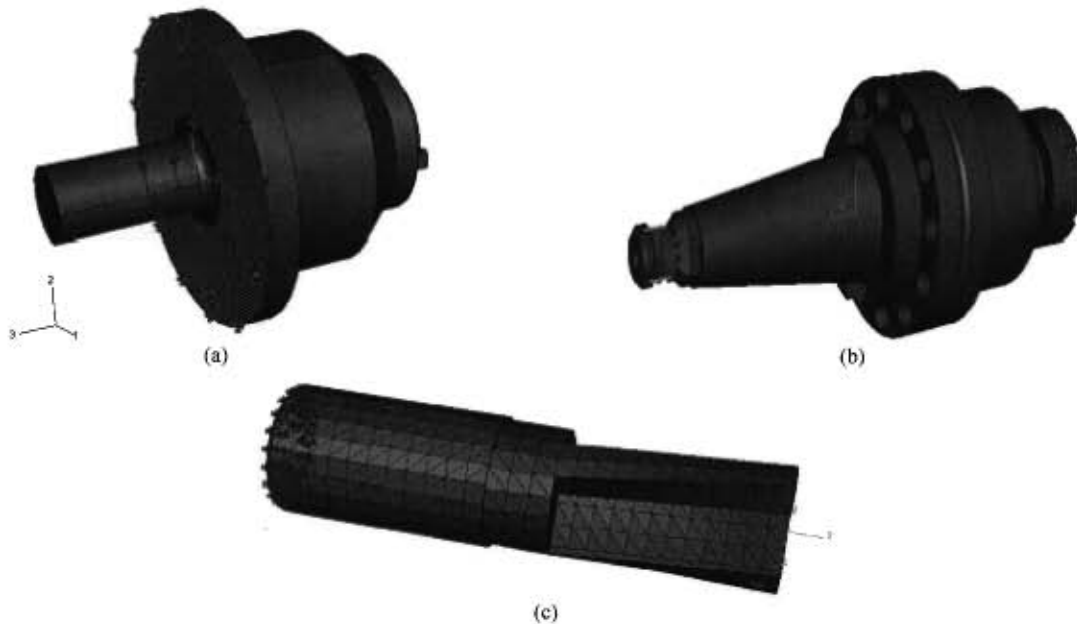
The free body diagram of milling components, (a) spindle assembly (b) Collet assembly (c) tool holder assembly (see online version for colours)
